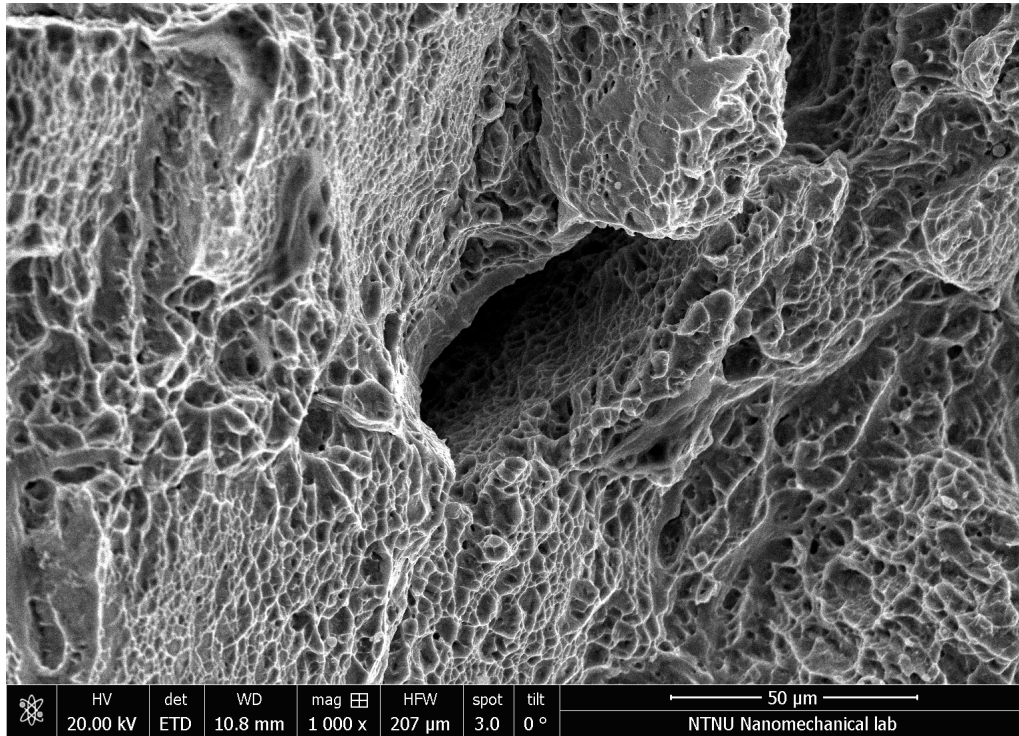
Pores found on the fracture surface of tensile specimens.
